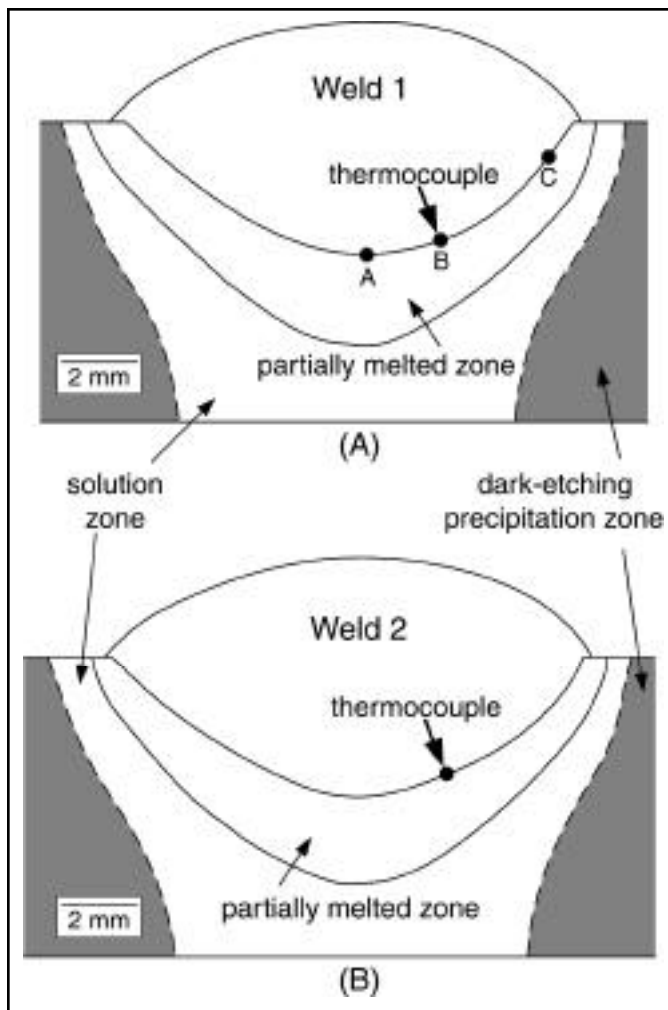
Transverse cross sections of partially melted zones: A — Weld 1; B — weld 2. Points A, B and C are locations of the micrographs shown in Figs. 7, 6 and 9, respectively.
